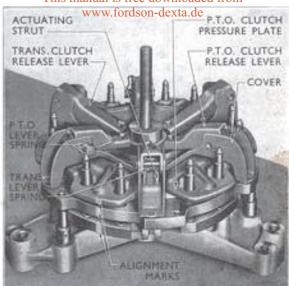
Installation of Clutch and P.T.O. Pressure Plate Assembly on Fixture
